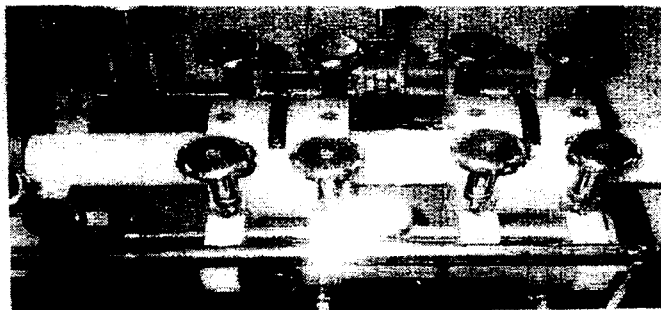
Photograph of Polyethylene butt Heat Fusion Welding Machine
